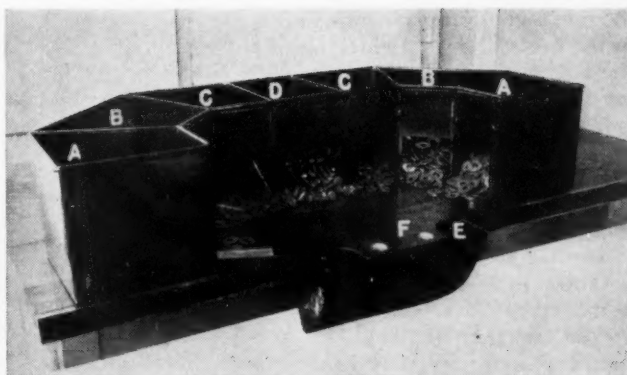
BINS, FIXTURE, AND CHUTE FOR BOLT AND WASHER ASSEMBLY
